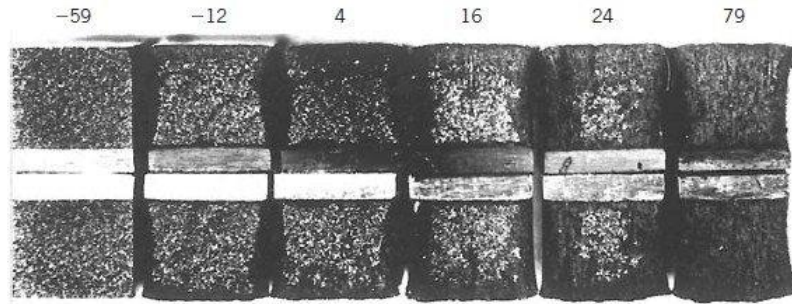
Charpy test fracture surfaces of A36 steel at varying temperatures (°C) with fracture surface appearances shifting from brittle on the left to ductile on the right [1].
